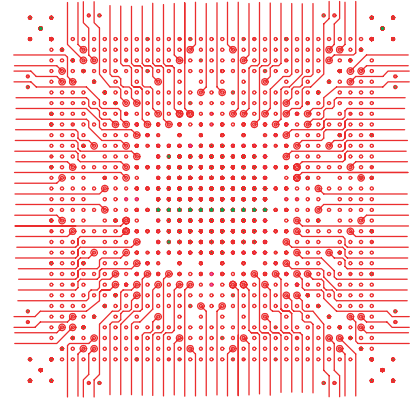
XCV1600E - FG900 NSMD Solder Land Pad Layout
